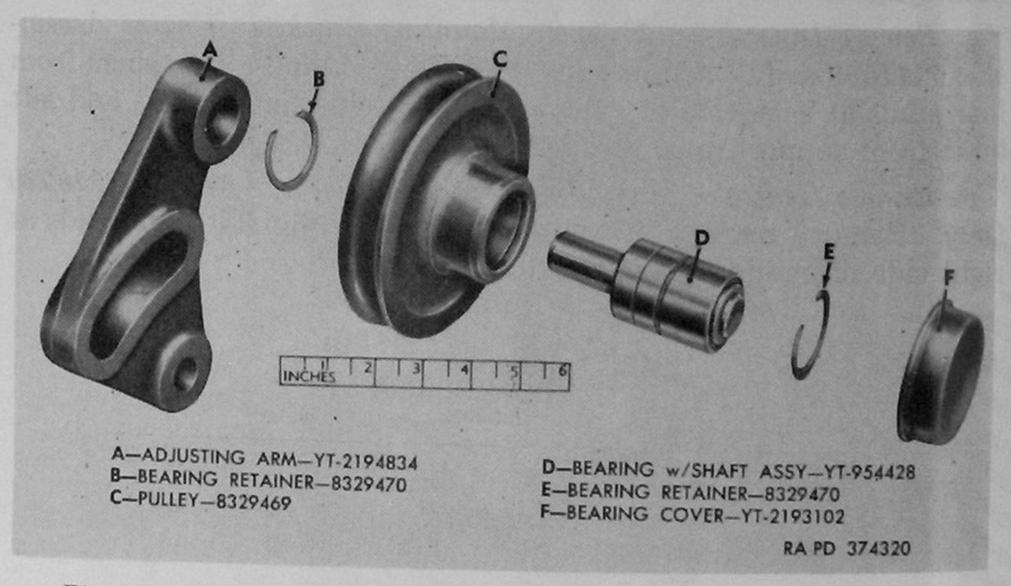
Drive belt idler assembly components—engine assembly 8329440.
